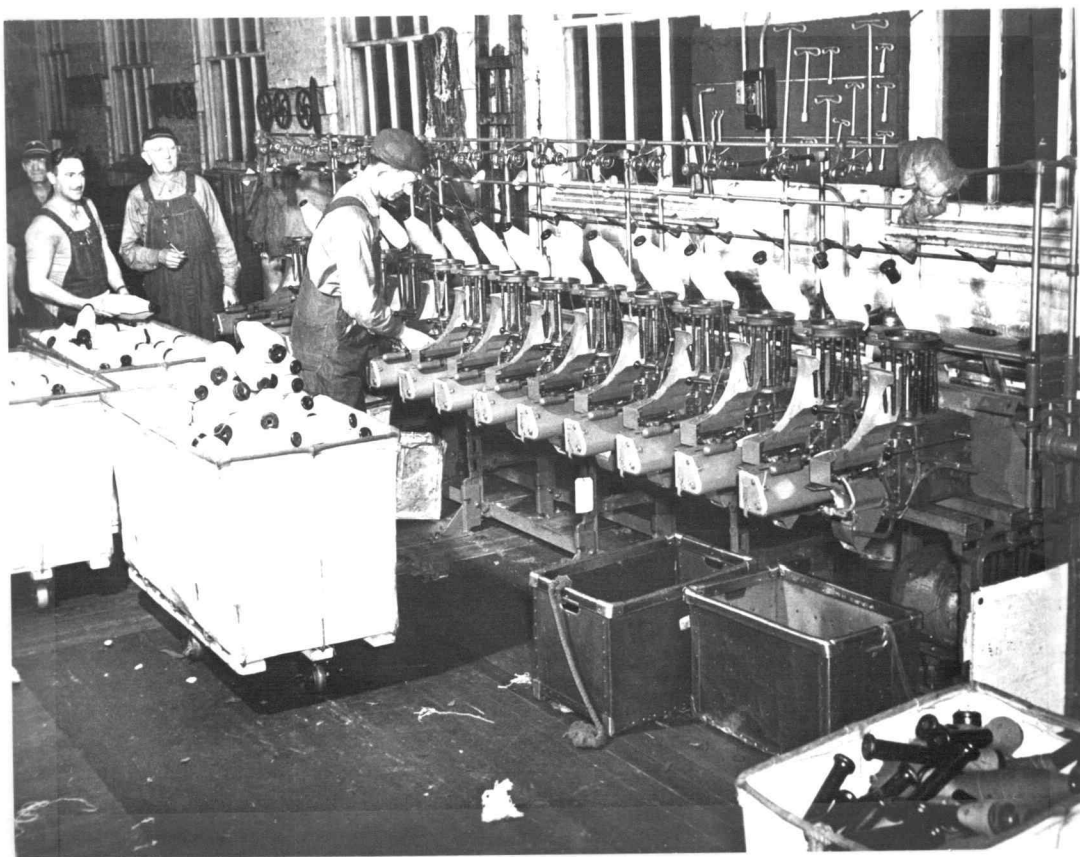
Bobbin winder which rewinds yarn onto shuttle bobbins.
